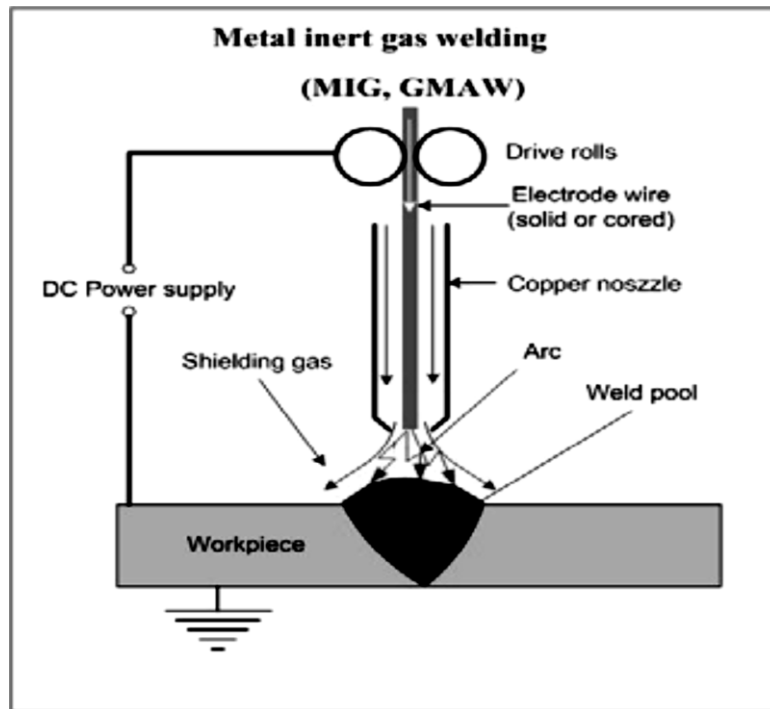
Gas Metal Arc Welding (GMAW) or Metal Inert gas welding (MIG)
